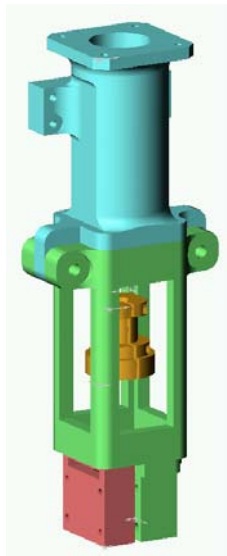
CAD Model of Rapid Prototyped Deposition Tool Components (Linear Actuator and Syringe Not Shown)
